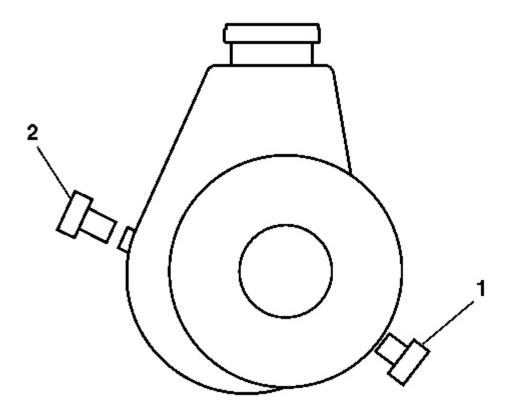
Installing Plugs Into Power Steering Pump Pressure & Return Ports Courtesy of GENERAL MOTORS CORP.
